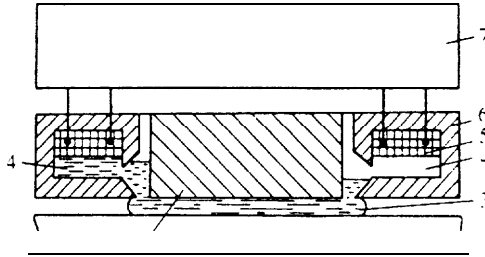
Schematic diagram of magnetofluid lubricant circulation in a sliding bearing [28]: 1, bearing; 2, shaft; 3, magnetic fluid; 4, cavities; 5, electromagnets; 6, cores; 7, current source.
